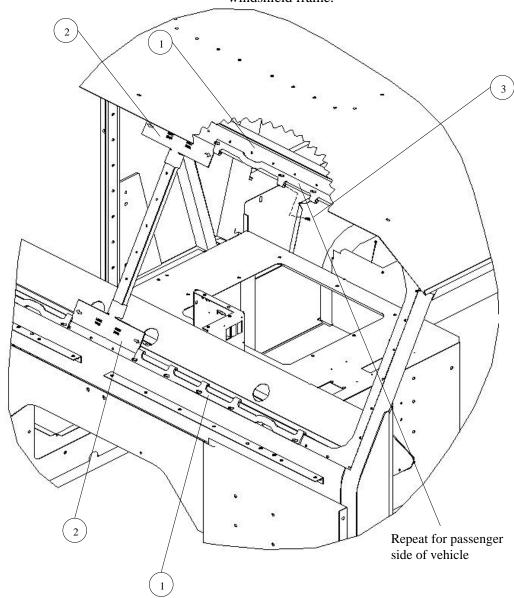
Upper and Lower Windshield Brackets Installation.
